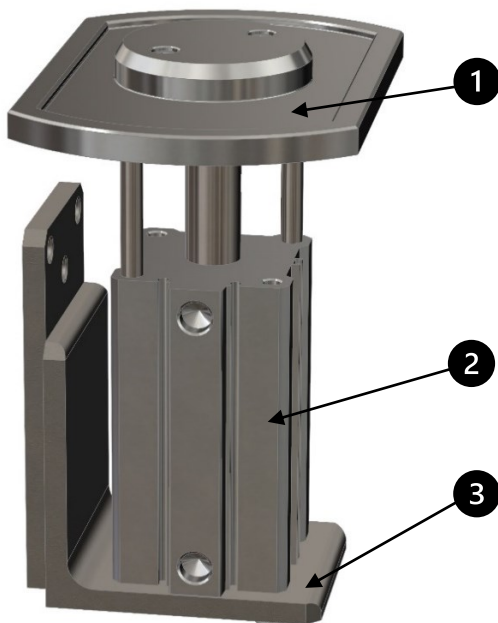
Core plug lifting mechanism. (1) Lifting plate. (2) Pneumatic cylinder. (3) Mounting bracket.
